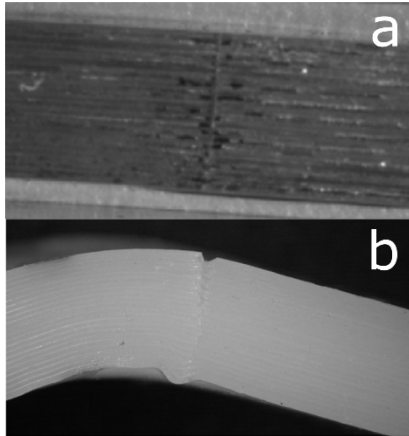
Failure crack propagation through thickness. a. Cross section of propagated crack b. Detail of specimen failure.
